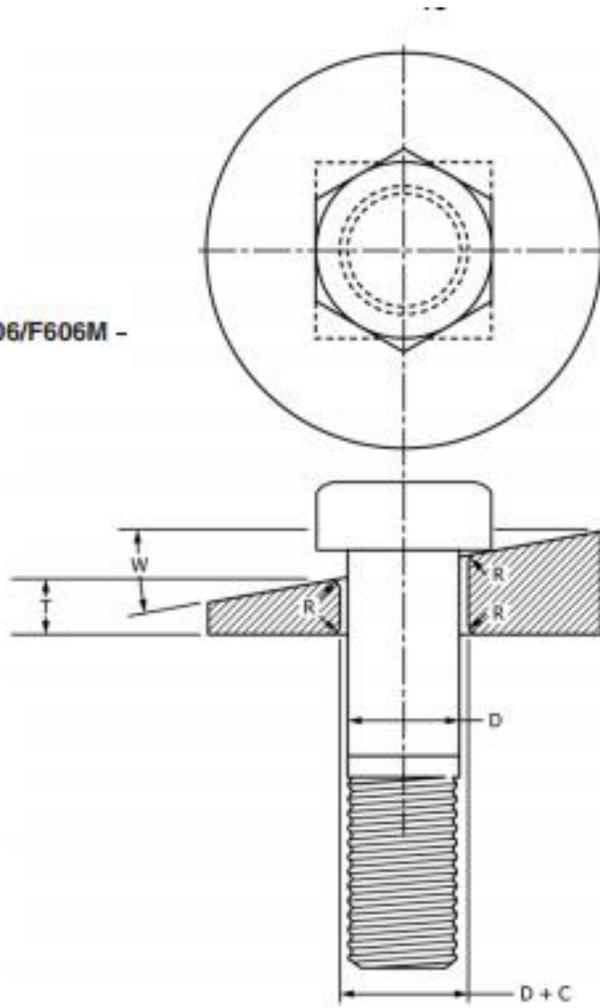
Tension Testing of Full-Size Bolt (Typical Set-Up)
